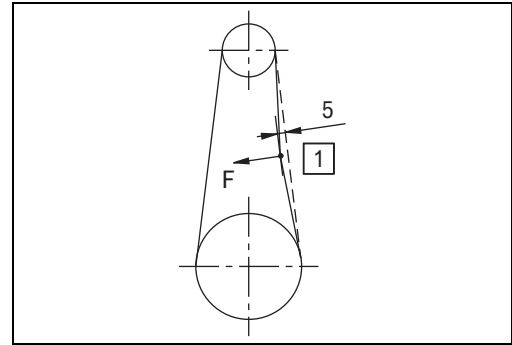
Checking V-belt tension MONSUN up to 7.5 kW
